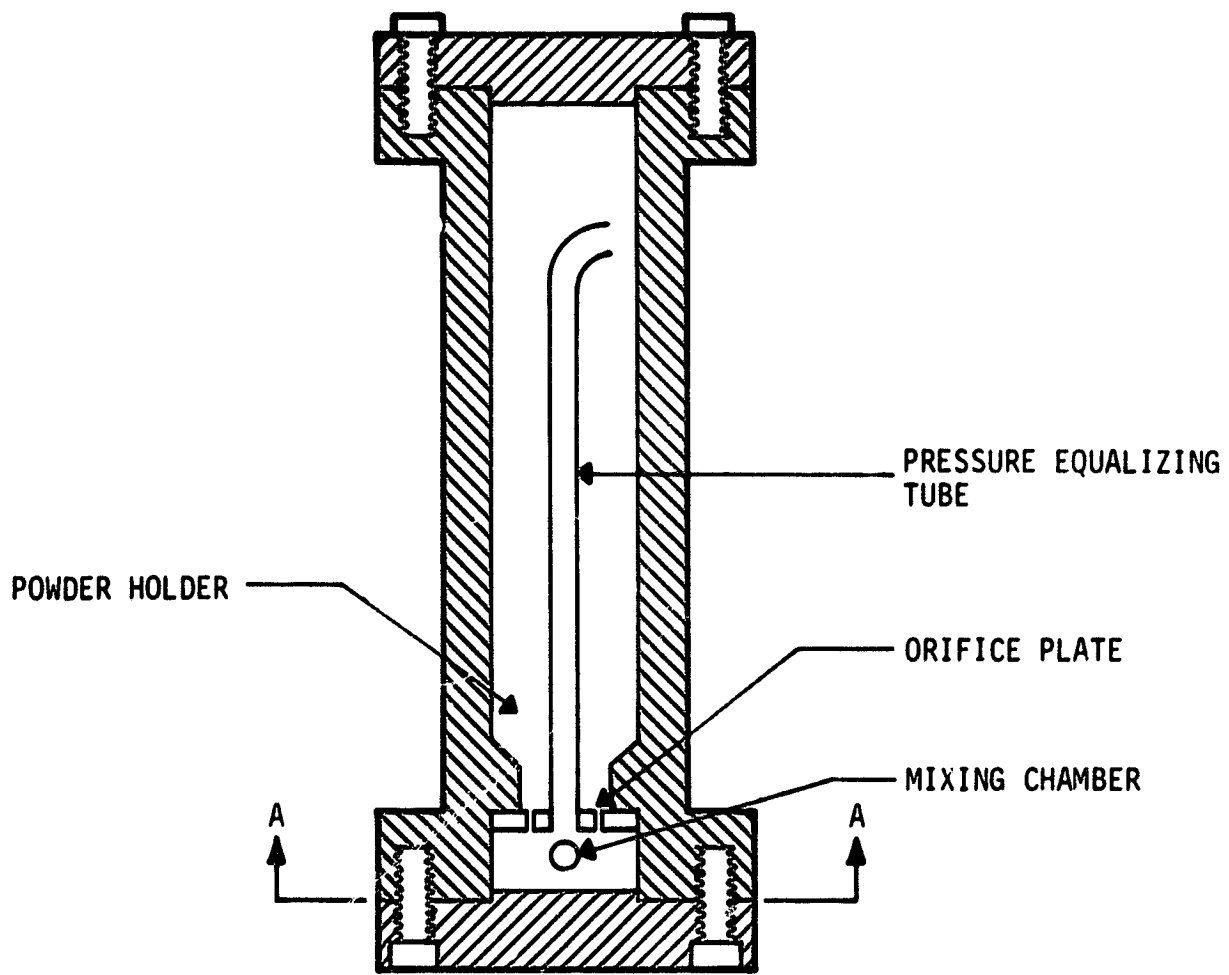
Syntron Vibra-Drive Unit and Particle Cloud Generator Assembly.
